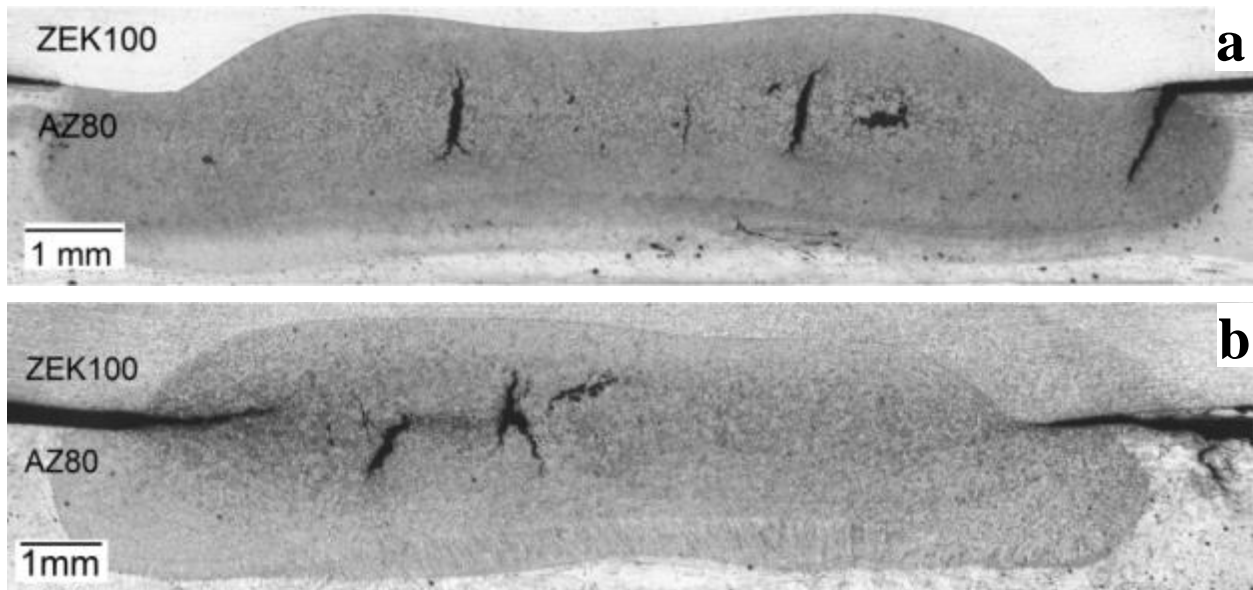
Overview of AZ80/ZEK100 nugget after the tensile shear test (stopped at load-to-failure): (a) As welded and (b) heat treated conditions
